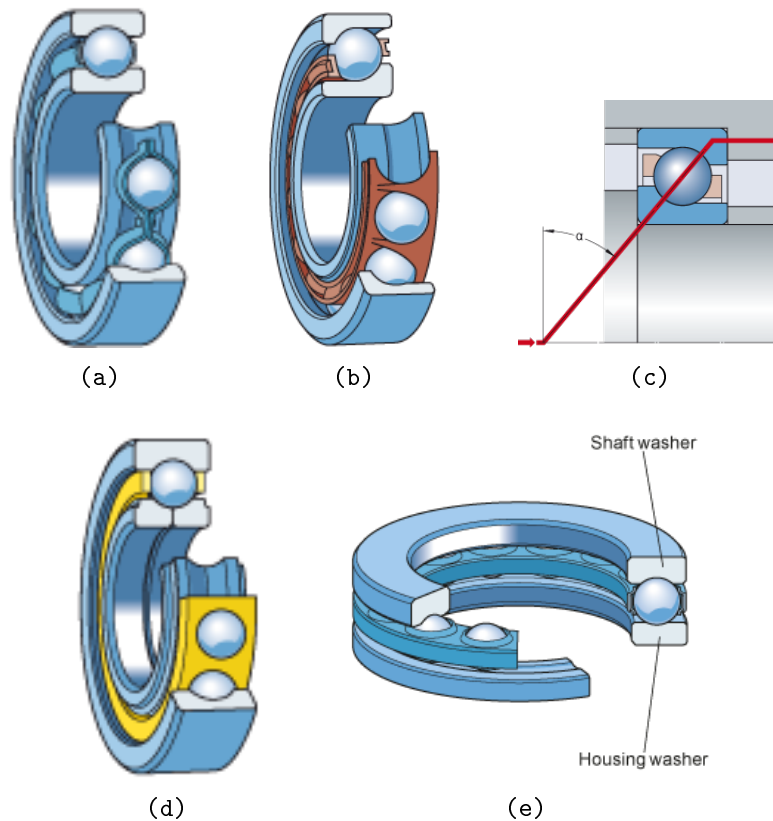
Photograph of (a) a deep groove ball bearing; (b) an angular contact bearing; (c) Contact angle of an angular contact bearing; (d) a four-point contacts bearing; (e) a single row thrust bearing, reproduced from SKF (accessed on 28-02-2015).
